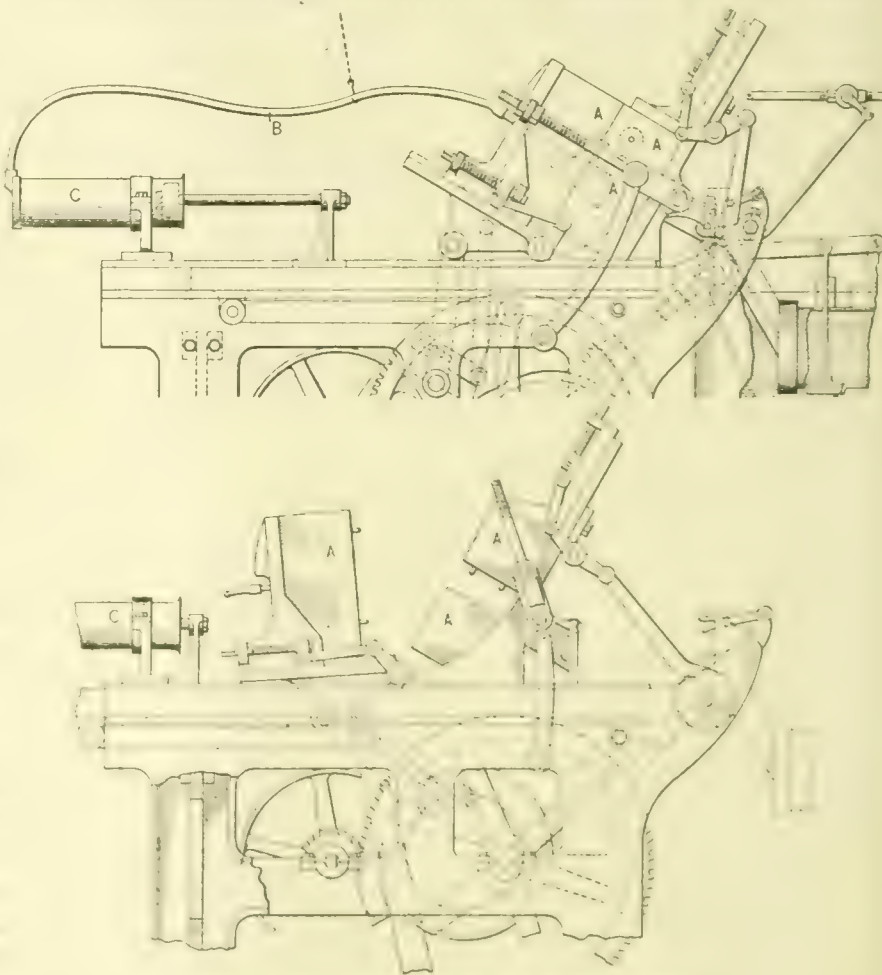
EXHAUSTING AIR FROM THE DIE Mould.
